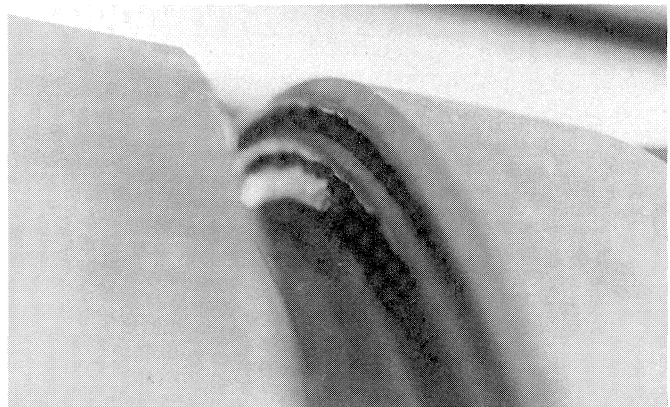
Standby Corrosion Damage to Rotor Drum in the Blade Attachment Region.
